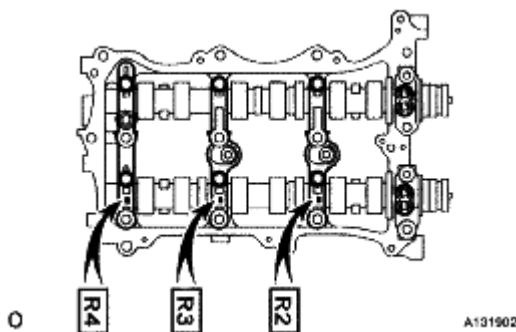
Identifying Marks And Numbers On Camshaft Bearing Caps
